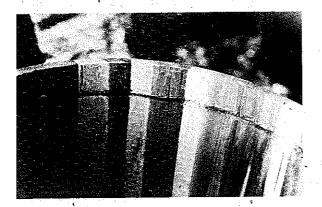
This groove was cut one inch from the bottom edge of the stayes.
